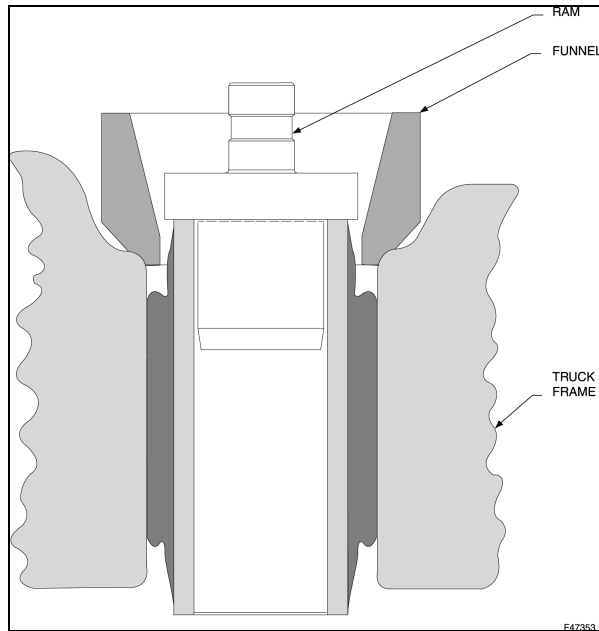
Carbody Pivot Rod Traction Bushing Installation
